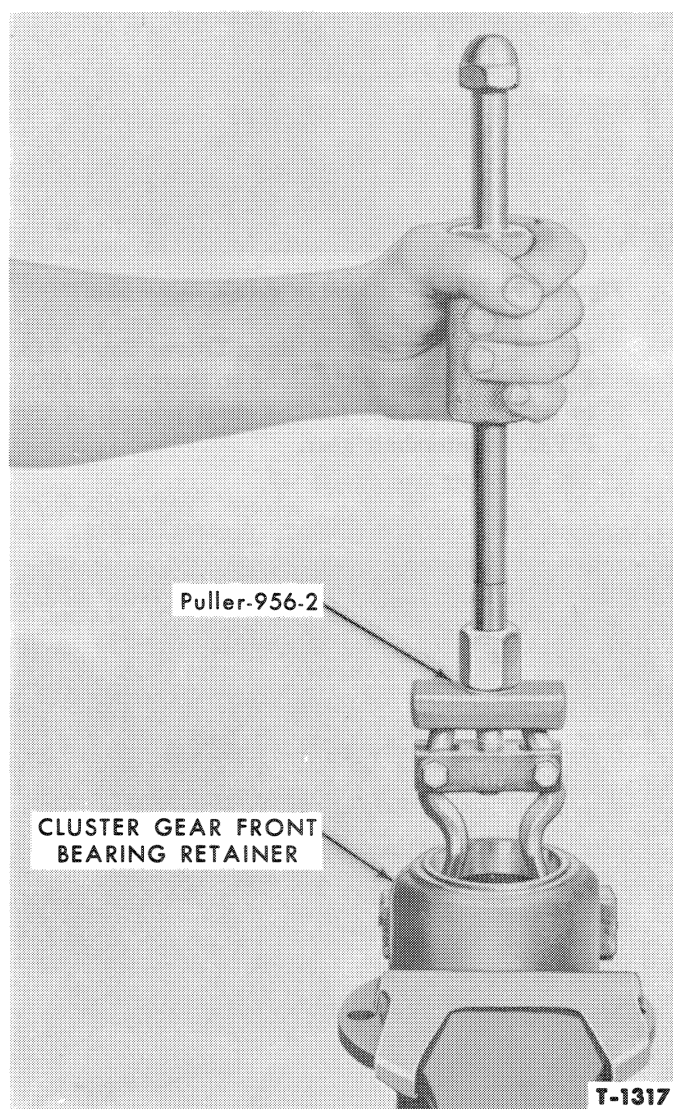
Removing Bearing Cup from Cluster Gear Front Bearing Retainer
